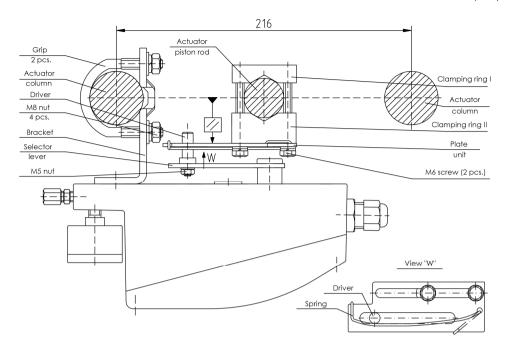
APIS-100-... type positioner with mounting set APIS-A000 (positioner assembled on column actuator of P or R type with columns axle base 216 mm manufactured by Polna S.A.).
